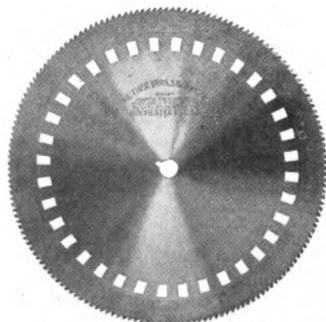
INSERTED TOOTH MILLING SAW—Fine Pitch Type
